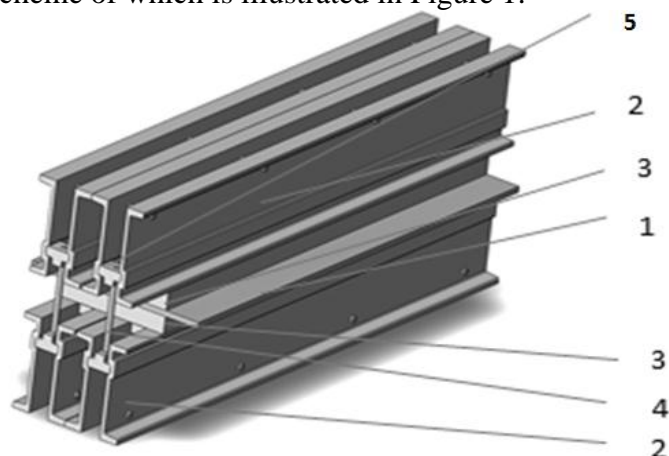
General scheme of joint installation: 1 - conveyor belt; 2 - traverse; 3 - heating plate; 4 - system for fixation of traverse package; 5 - hydraulic pistons for maintaining the pressing pressure
